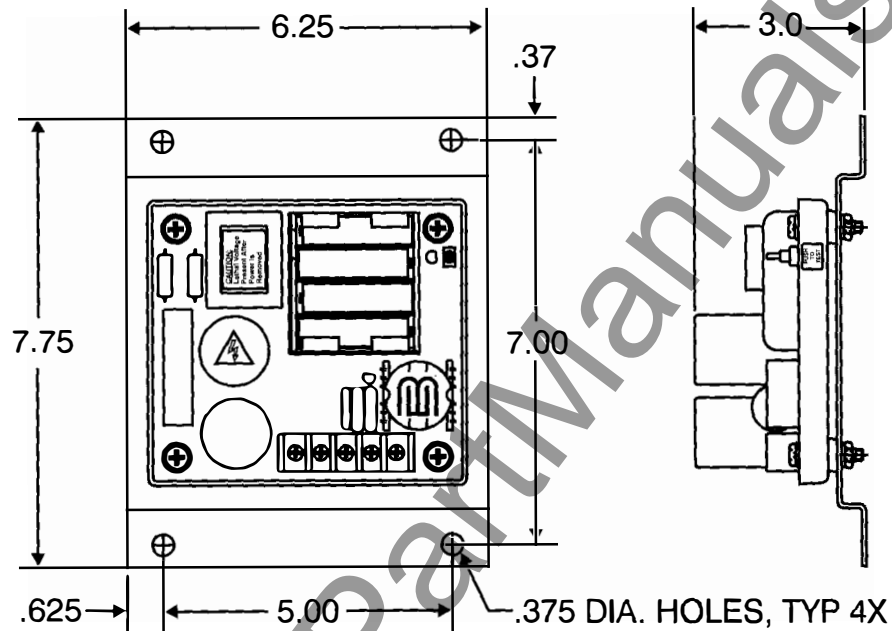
DIMENSION DRAWING, OPTIONAL CONVERSION MOUNTING PLATE
